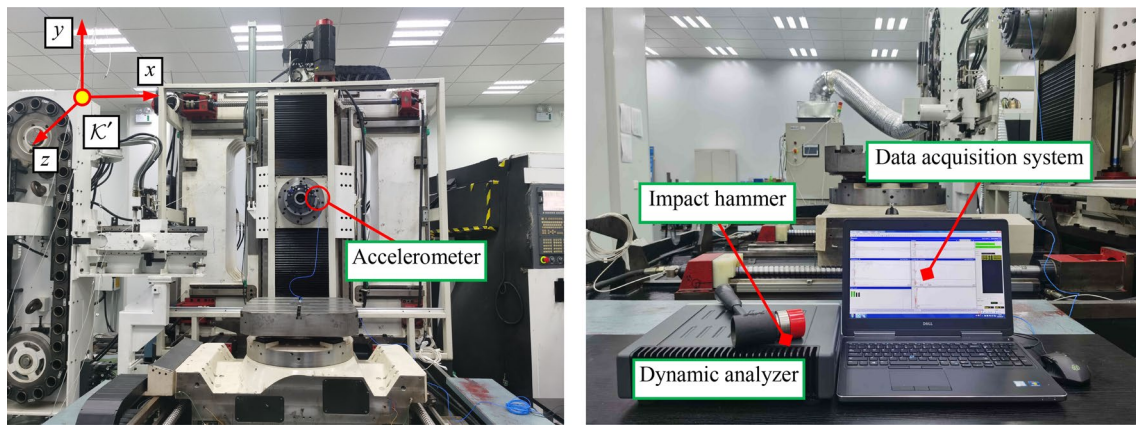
Experimental setup for the modal test of a box-in-box precision horizontal machine tool
